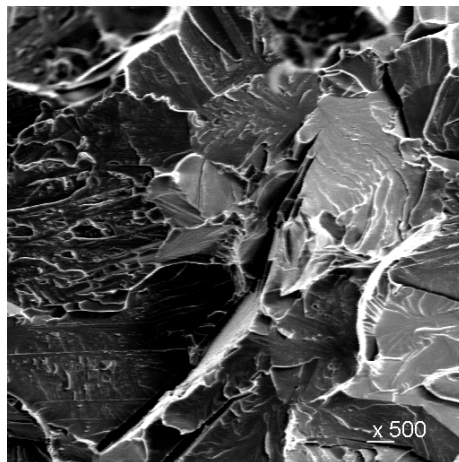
Tensile fracture surface, obtained in the welded bead, after testing a dissimilar welded joint of austenitic stainless steel and low carbon steel, using welding parameters $I_w=9$ mA, $I_f=875$ mA and $v=8$ mm/s.
